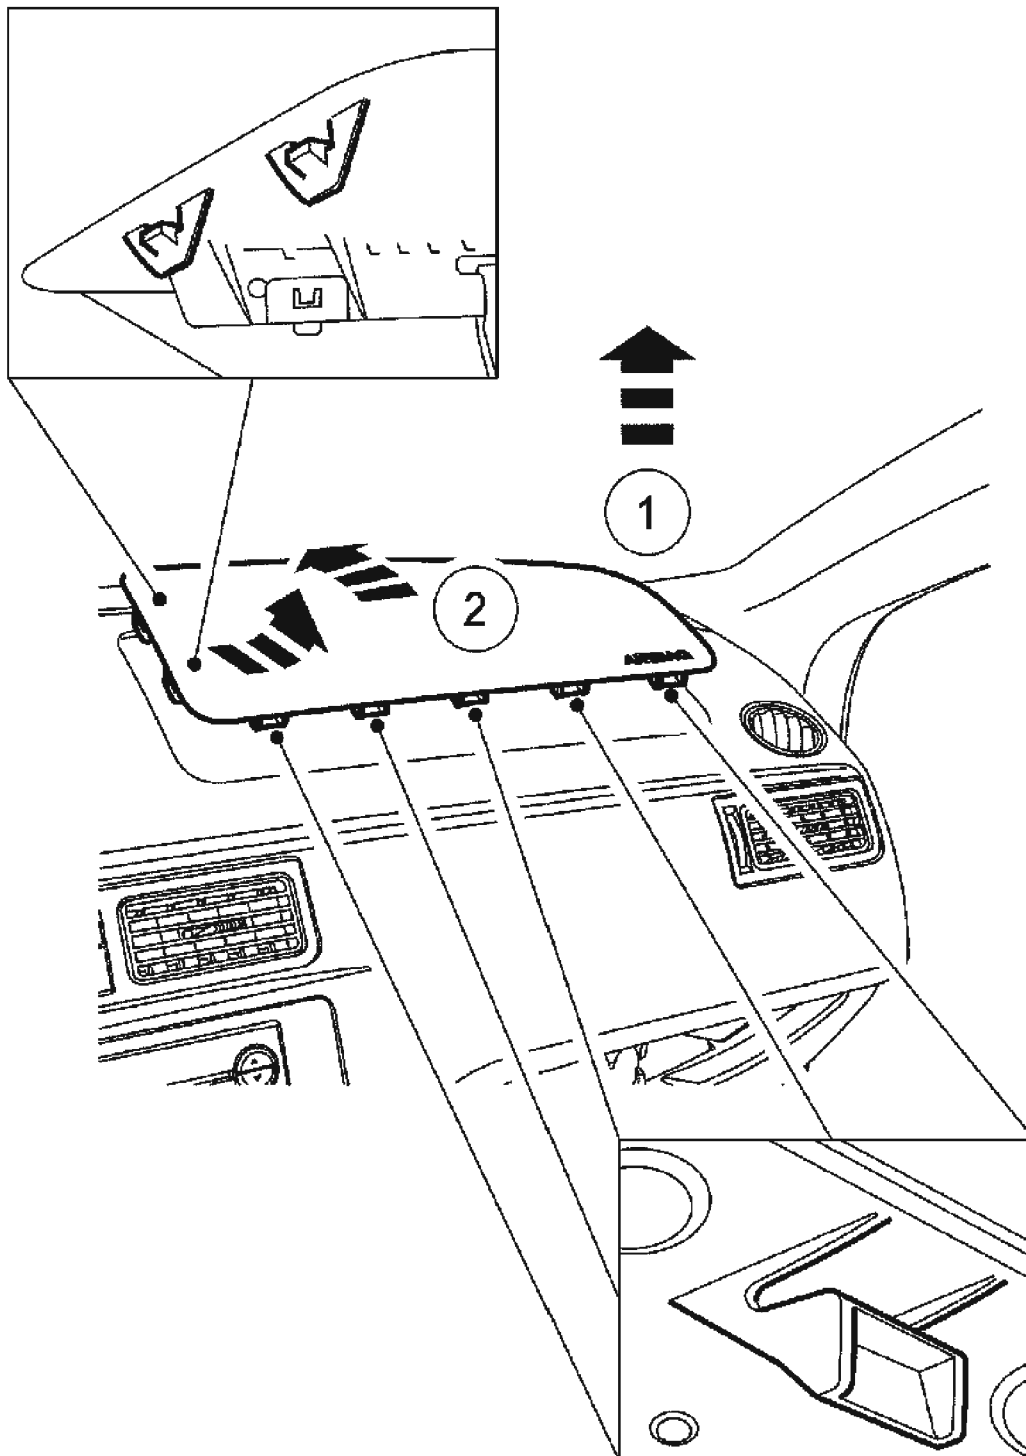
Detaching Passenger Air Bag Module Trim Cover From Instrument Panel
